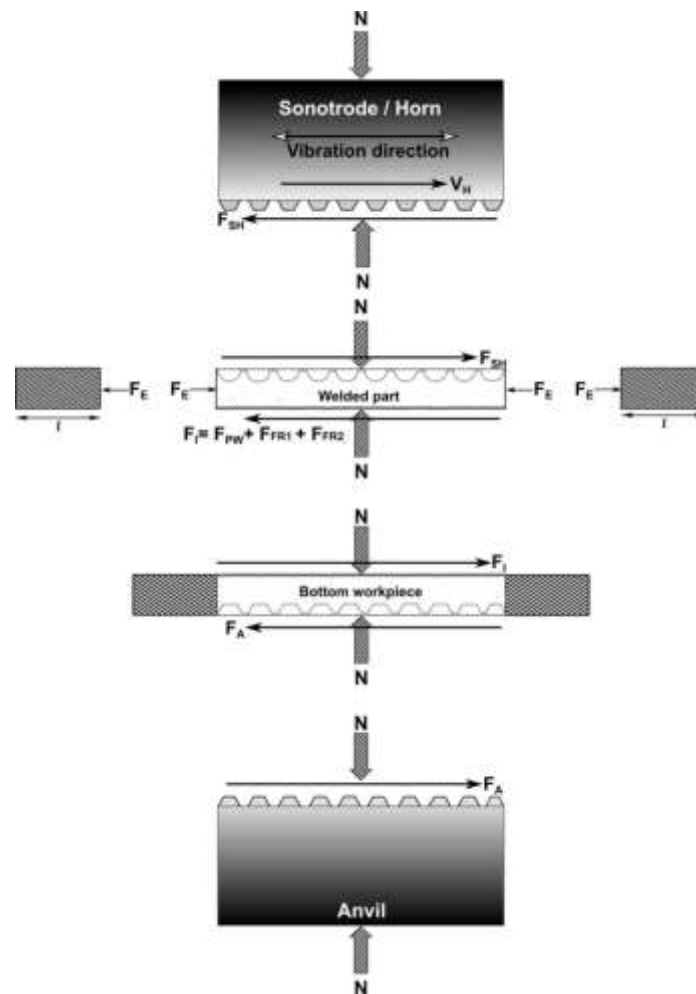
Detailed analysis of forces acting on individual components during the welding [18]
